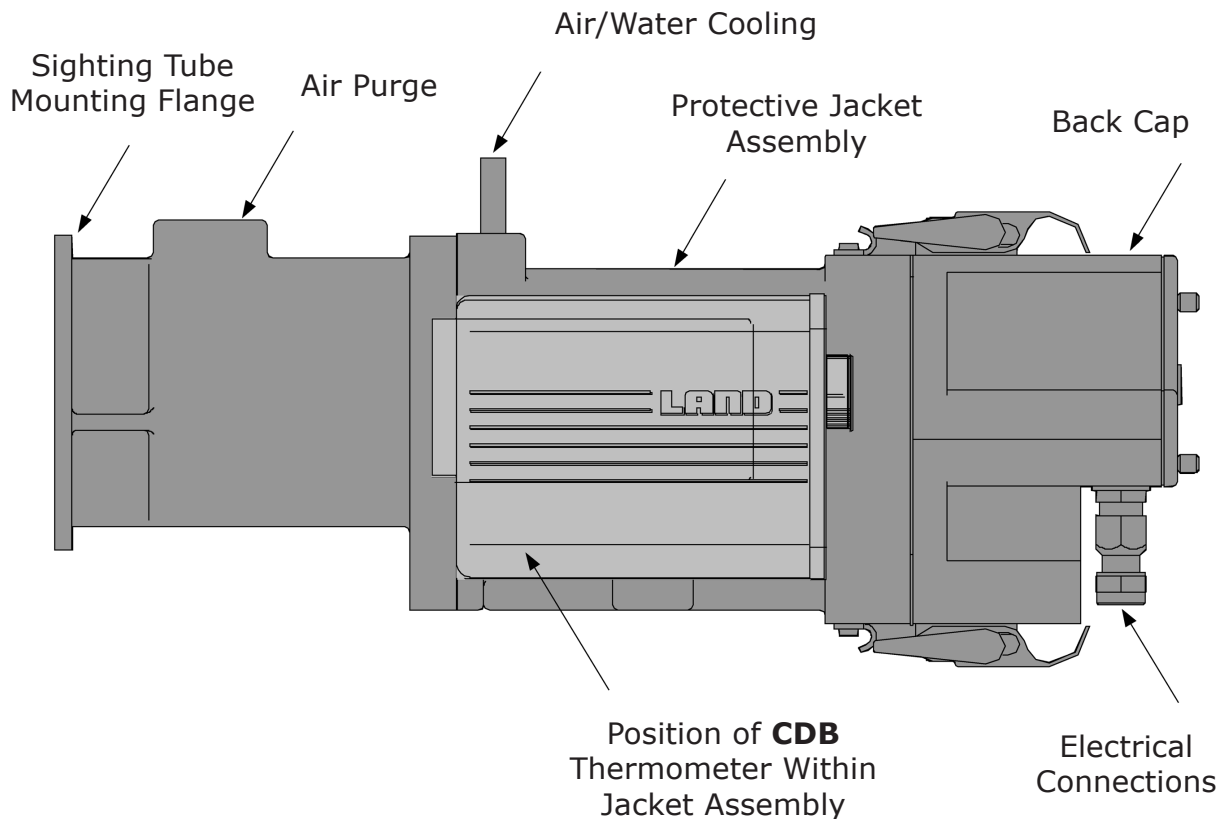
CDB Thermometer in Protective Jacket Assembly
